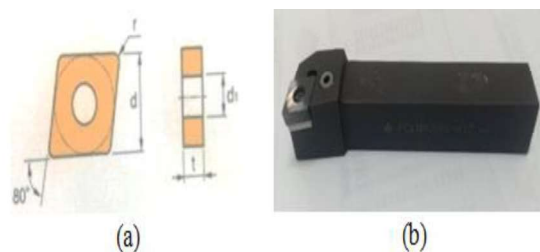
(a) the CNMG 120408-HA carbide inserts; (b) a carbide insert mounted on a tool holder of MCLNR2525M12.
